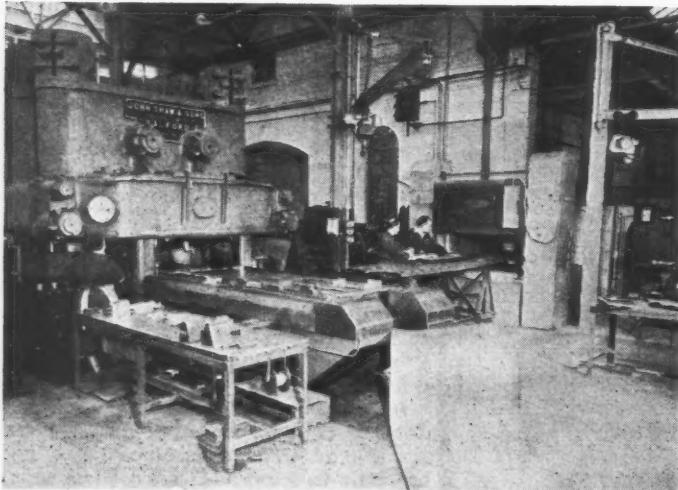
Hot forming of titanium parts : rubber press arrangement
